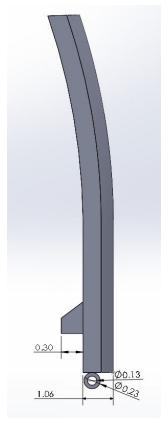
Stabilizing Leg Side View Dimensions
